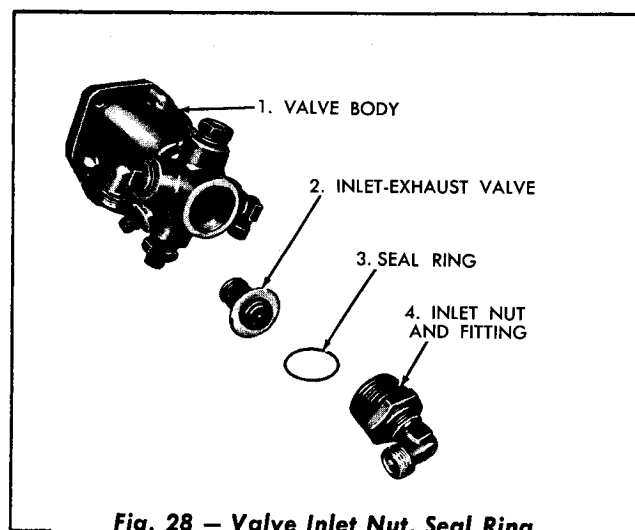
Valve Inlet Nut, Seal Ring, Intake-Exhaust Valve, and Valve Body Details
